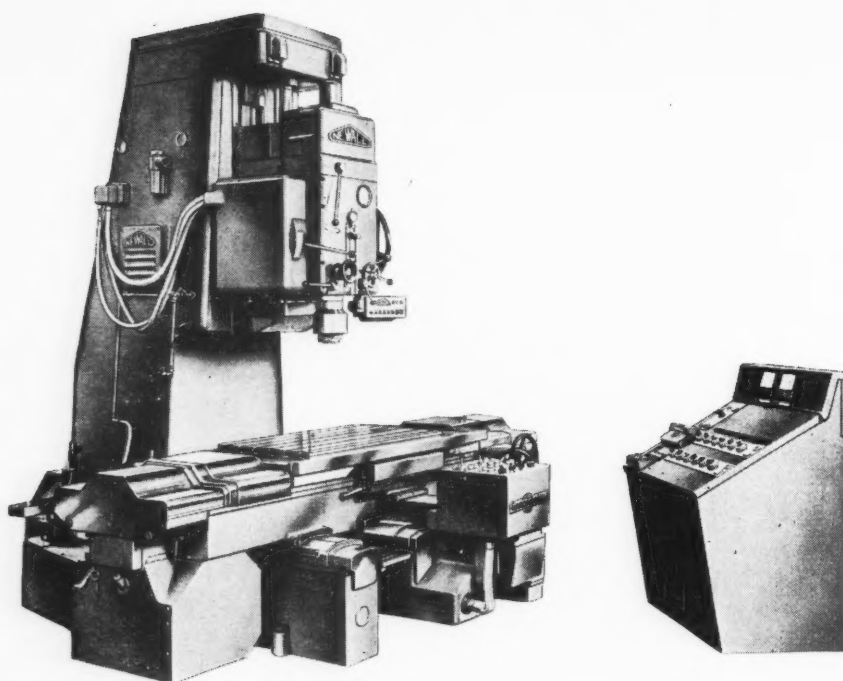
The Newall "Spacematic" automatic co-ordinate setting jig boring and milling machine.
